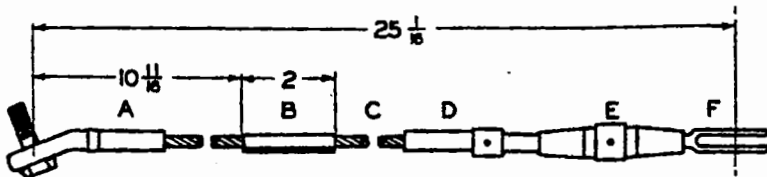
(Sheet 1 of 3 Sheets.) Flexible Cable and Chain Assemblies Reference Diagram.
